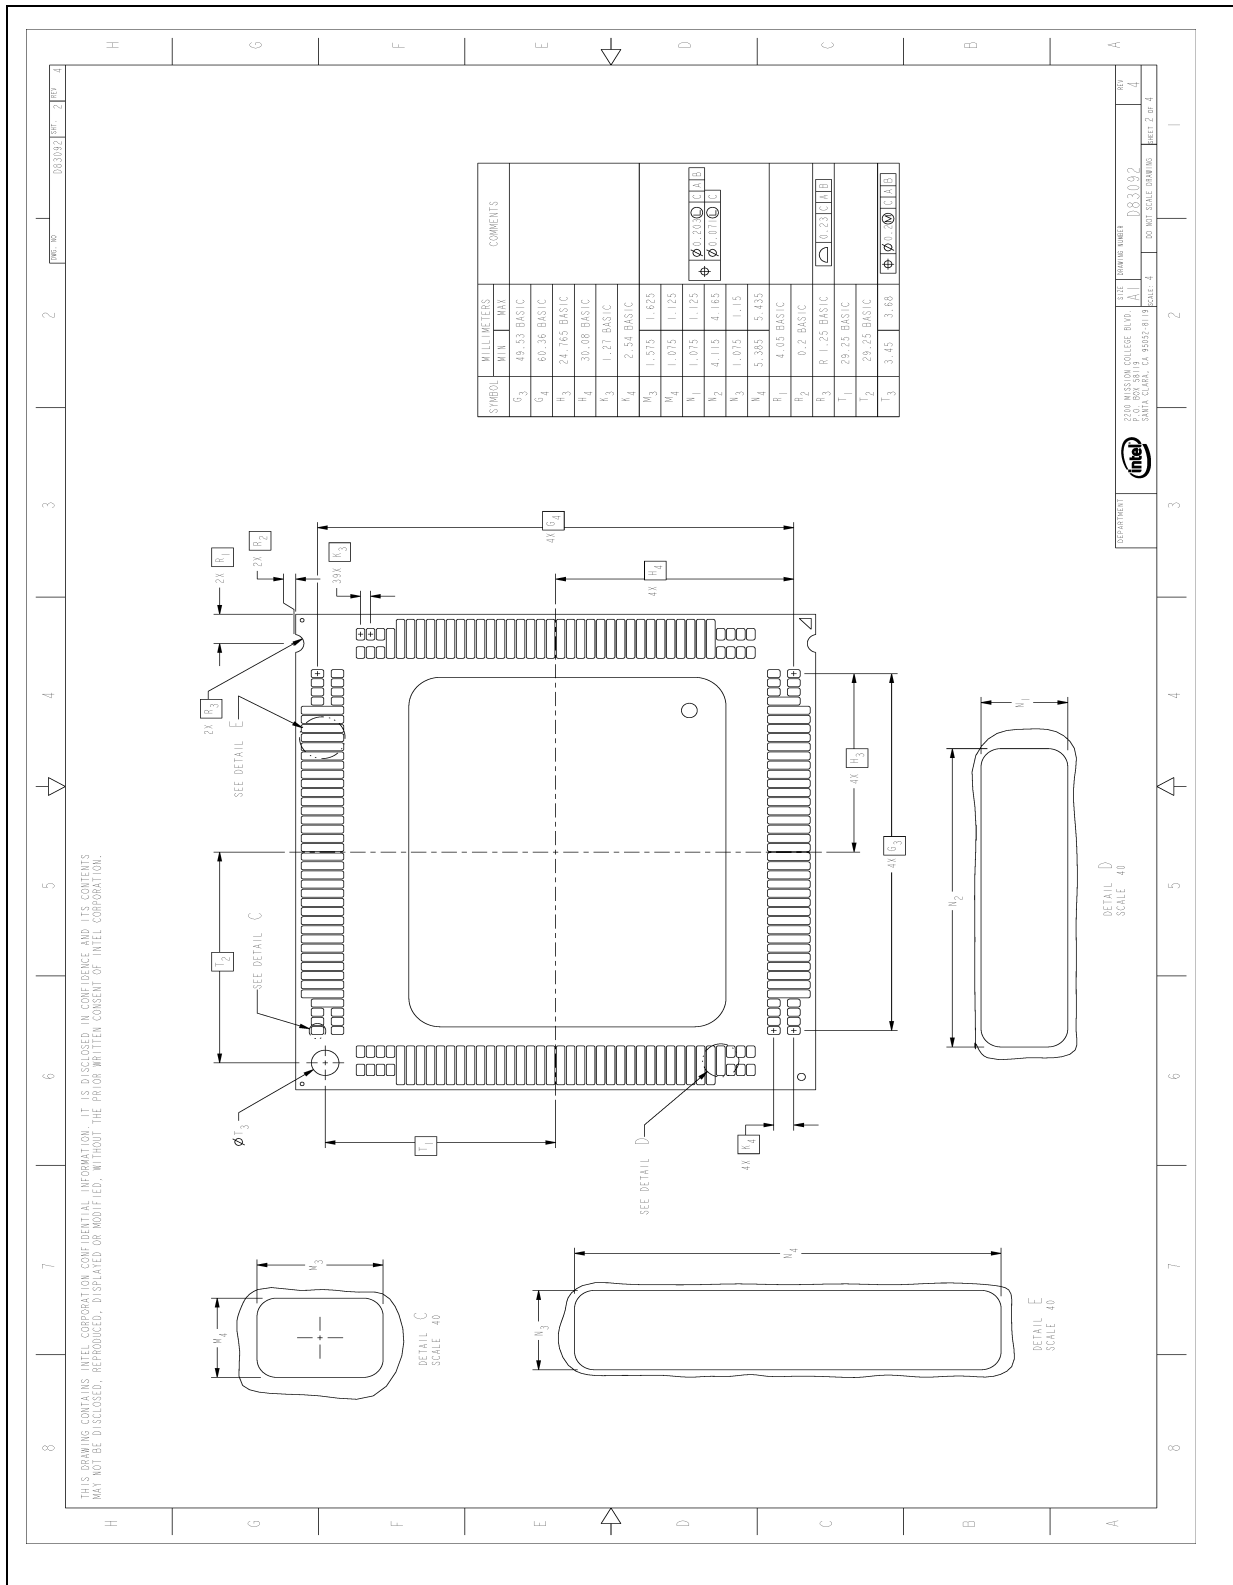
Processor Package Drawing (Sheet 2 of 4)
